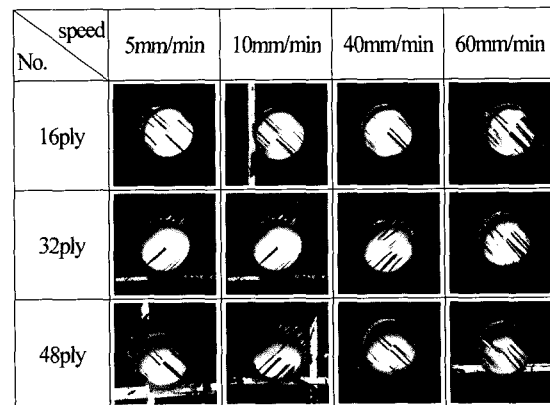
Photograph on exit side of drilled specimen (ϕ : 12mm, rpm: 1500)
